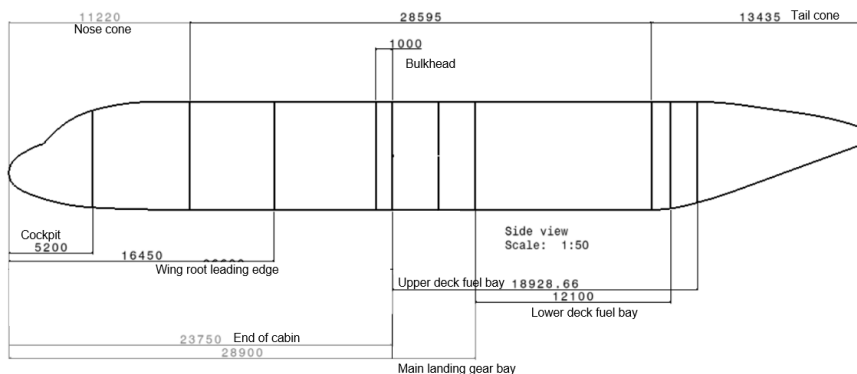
Technical drawing of the fuselage with all relevant dimensions expressed in [mm].
